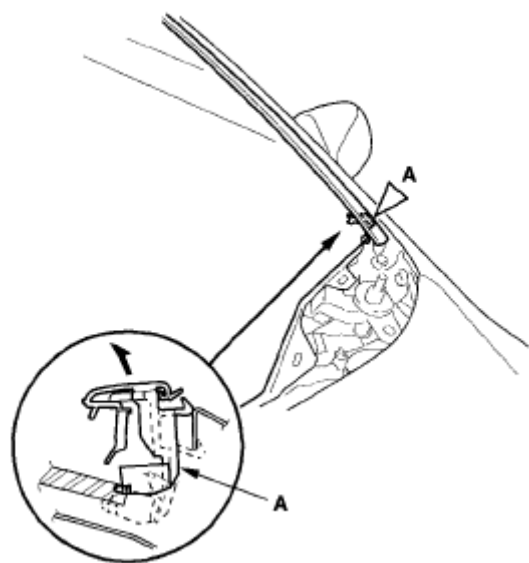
Detaching Bottom Clip At Lower Corner Of Windshield
